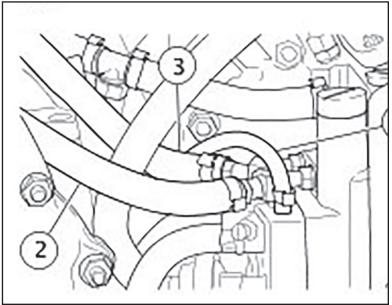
Pump Cover Oil Pressure Switch Mounting Hole
